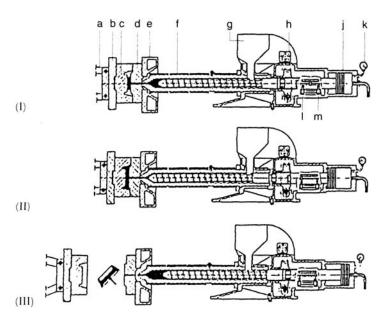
Injection moulding: design and operating sequence of a screw plunger injection moulding unit. (I) injection; (II) cooling (curing in the case of thermosets) under follow-up pressure; (III) ejection of the injection moulded part, (a) Clamping mechanism; (b) mould clamping; (c, d) injection mould; (e) mould clamping plate; (f) plasticating cylinder with screw plunger; (g) feed hopper; (h) screw drive; (j) hydraulic cylinder; (k) pressure gauge; (l) follow-up pressure limit switch; (m) screw stroke adjustment
